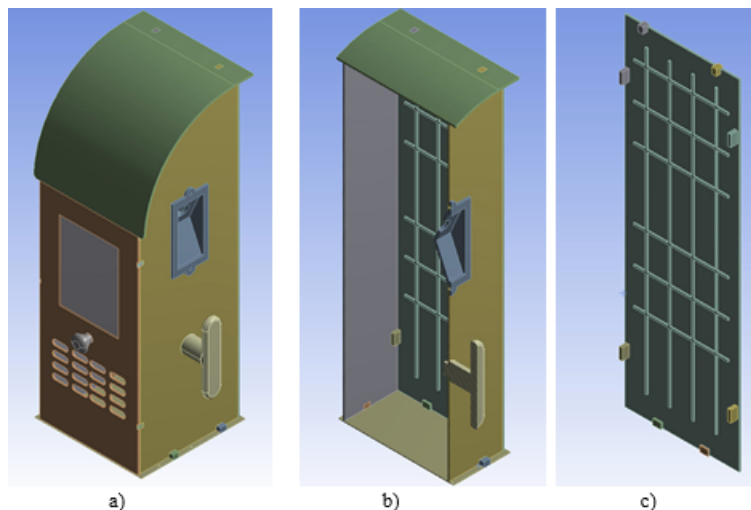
Model Assembly: a) isometric view; b) section view c) back plate
